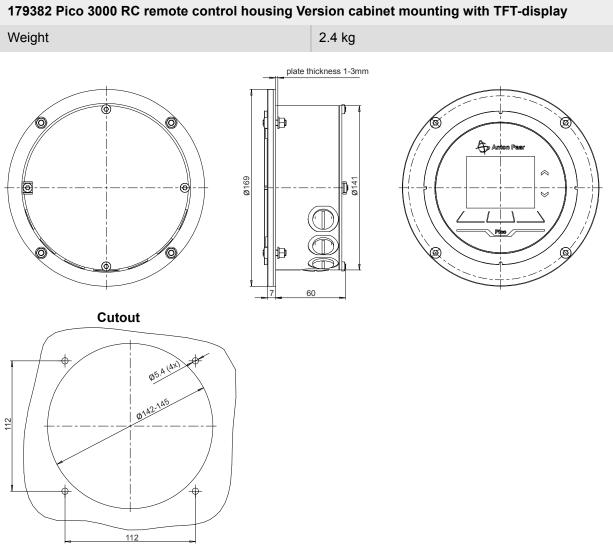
Dimensions Pico 3000 RC Cabinet Mounting
